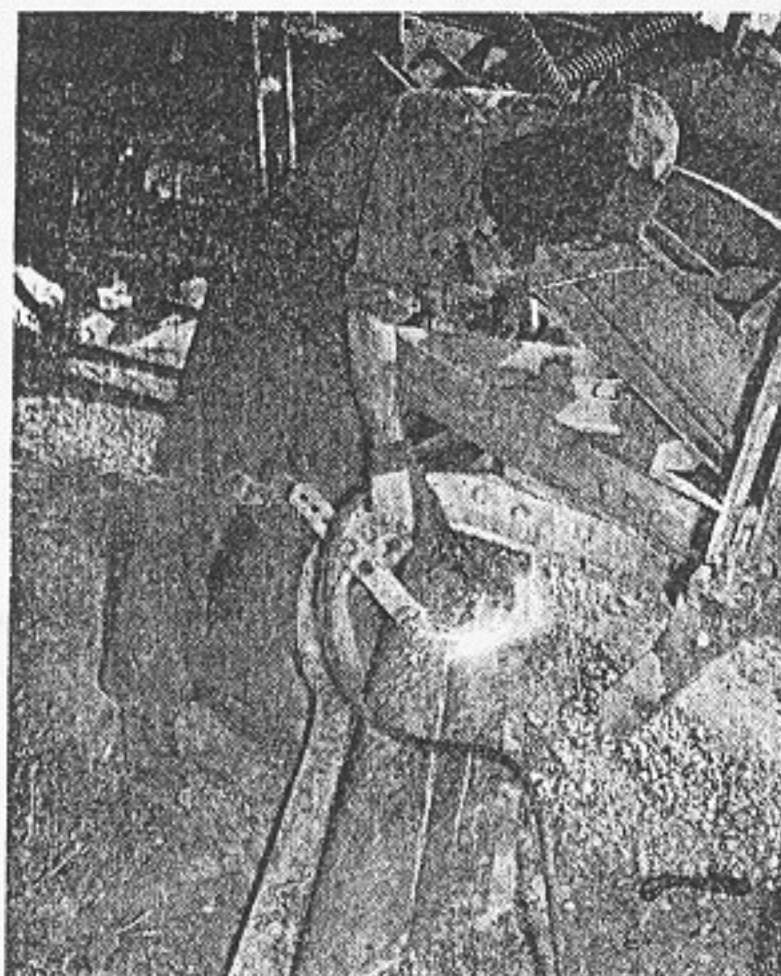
Flat welding of a bracket to scraper blade.
